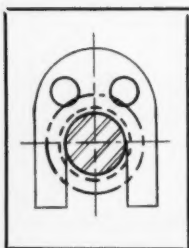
Sketch showing shape of retainer used with the screw type latch shown in Fig. 14.
